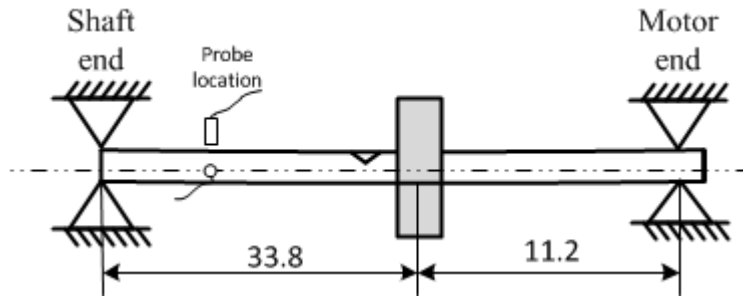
A schematic diagram of the rotor with a cracked shaft
